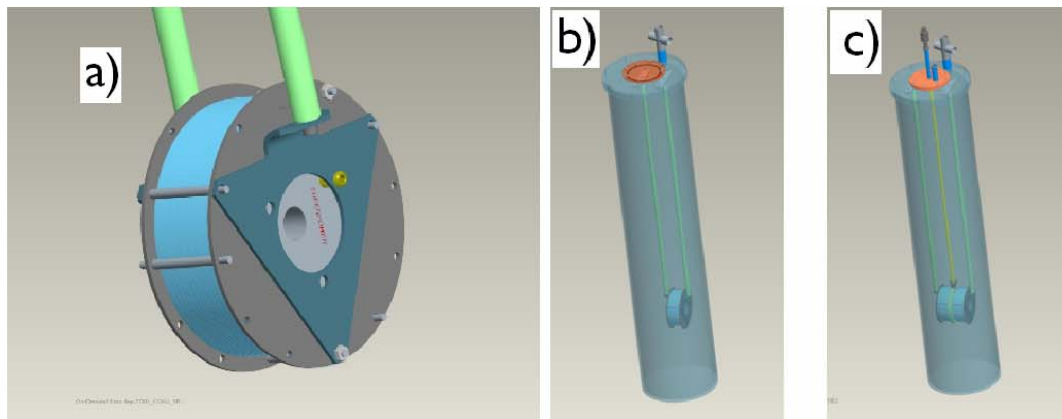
a) 14 pancake coils to be built and tested in FY 2009. b) on left shows a solenoid with 14 pancake coils to be built and tested inside the cryostat in FY09 and (c) on right shows 28 pancake coils (a 14-pancake coil on either side of a test sample) in FY10 as a part of the current SBIR Phase II .
